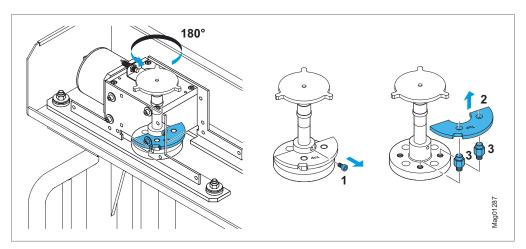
Removing the hold-down screw, locking disc and centring bolt
